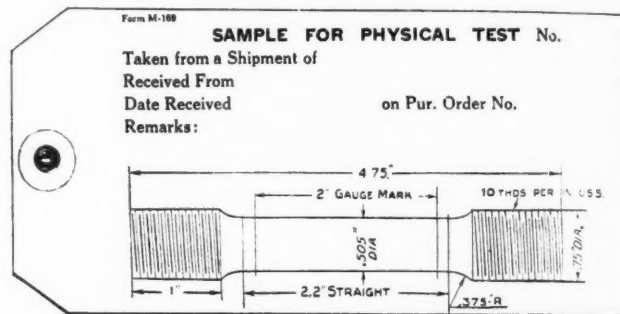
Tag attached to Steel Samples machined as shown for the Physical Test
